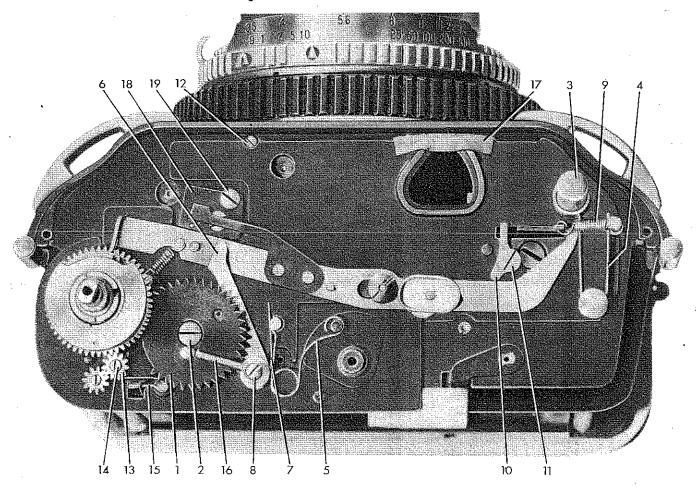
Mechanism Plate and Parts on Mechanism Plate
